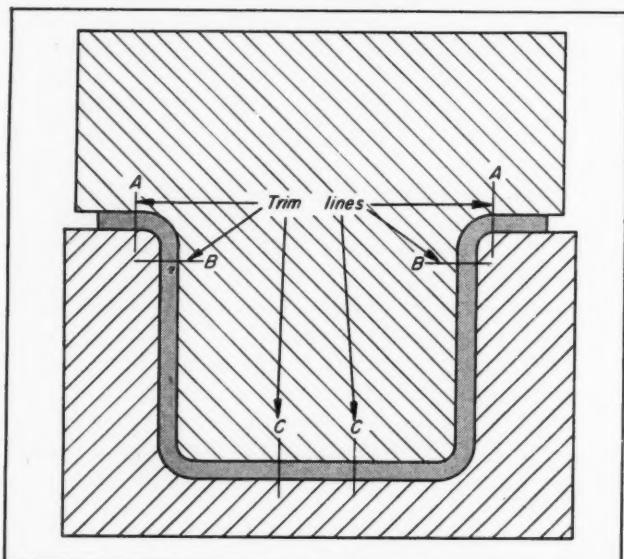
Above—Open mold process. Work is confined between two fitting dies. Flange required for this process can be removed after molding. A-A, B-B and C-C indicate trim lines of flanged, cylindrical or ported parts
